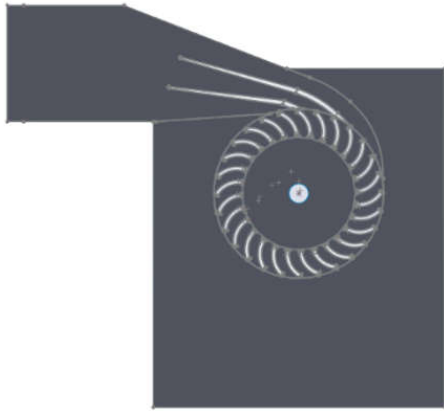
2-D Assembly view of the designed Cross Flow Turbine
